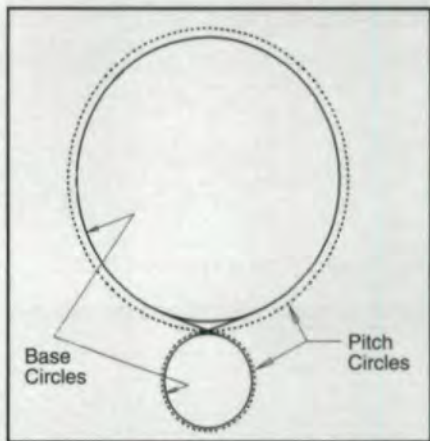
Involute geared transmissions are ideally equivalent to crossed-axis belt drives.
